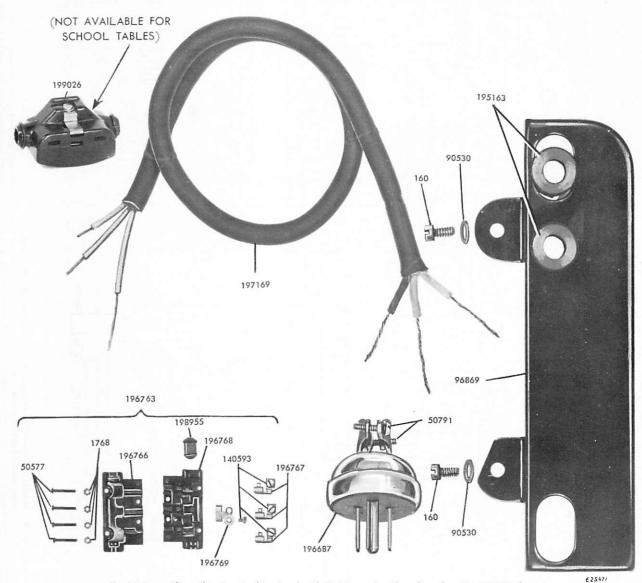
Parts Chart Showing Machine Lead with Bed Extension Plate Complete No. 196685, for Grounded Outfit No. 196681
